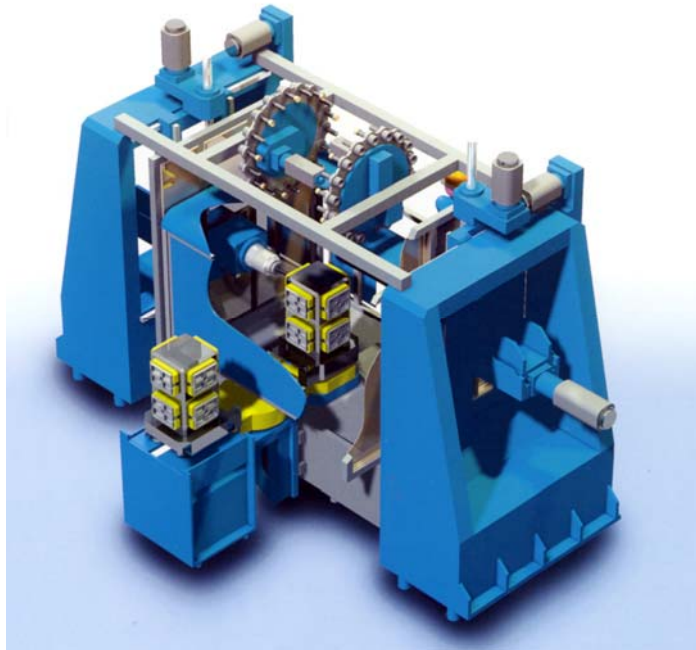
The main structure of the Twin-Mill machine tool. The picture shows the machine without the casings. Picture: the Fastems brochure.
